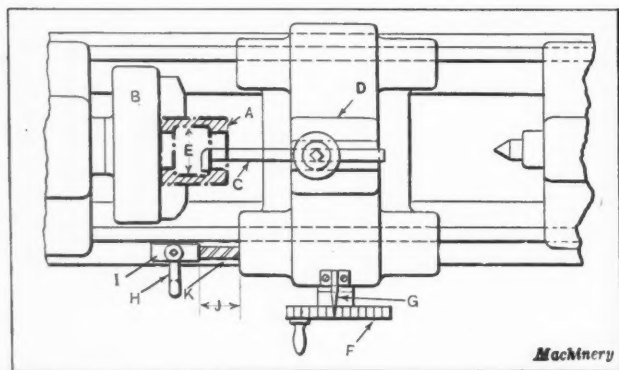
Lathe provided with Gaging Devices for Recessing Operation
